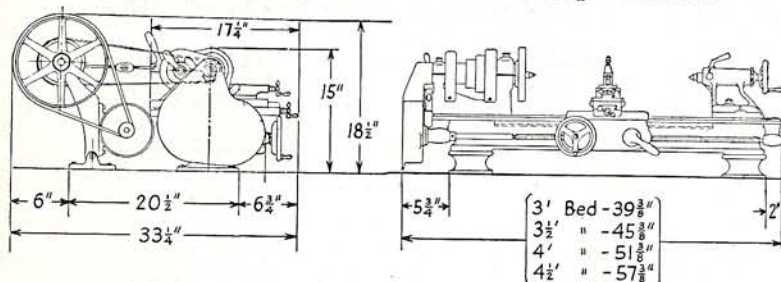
Floor Space Required for 9-inch "Workshop" Bench Lathes.
